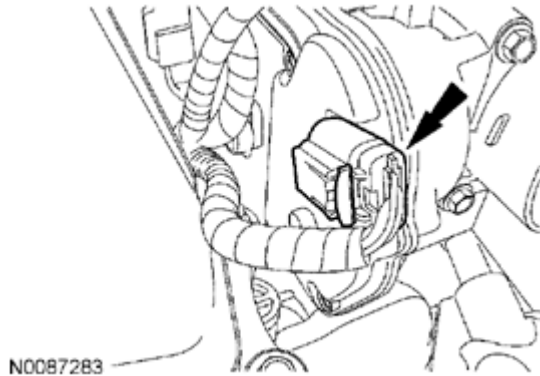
Locating Electronic Throttle Control Electrical Connector
